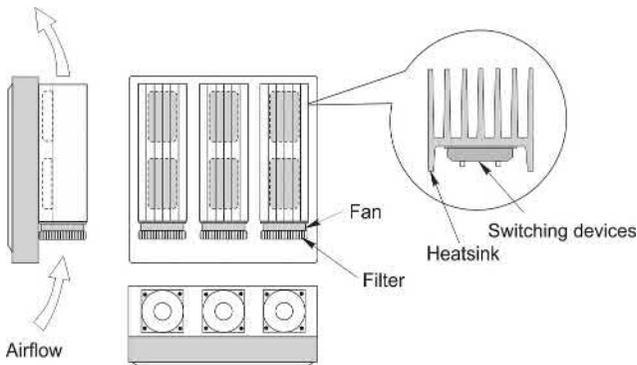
Layout of converter showing heatsink and cooling fans.
